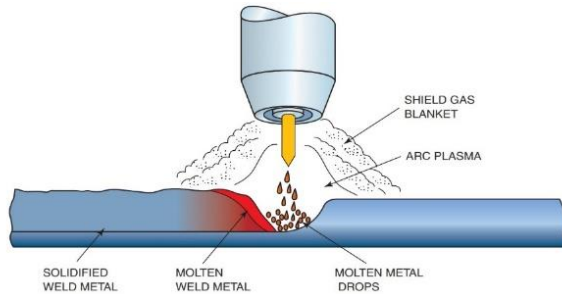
Gas-shielded metal arc welding (GMAW)
